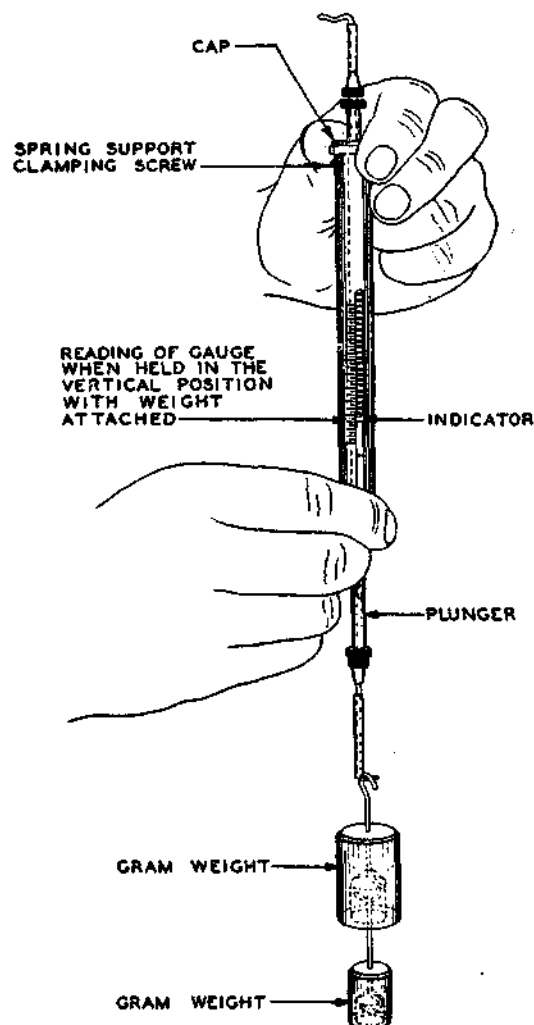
Method of Checking Accuracy of a Coil-type Gauge
